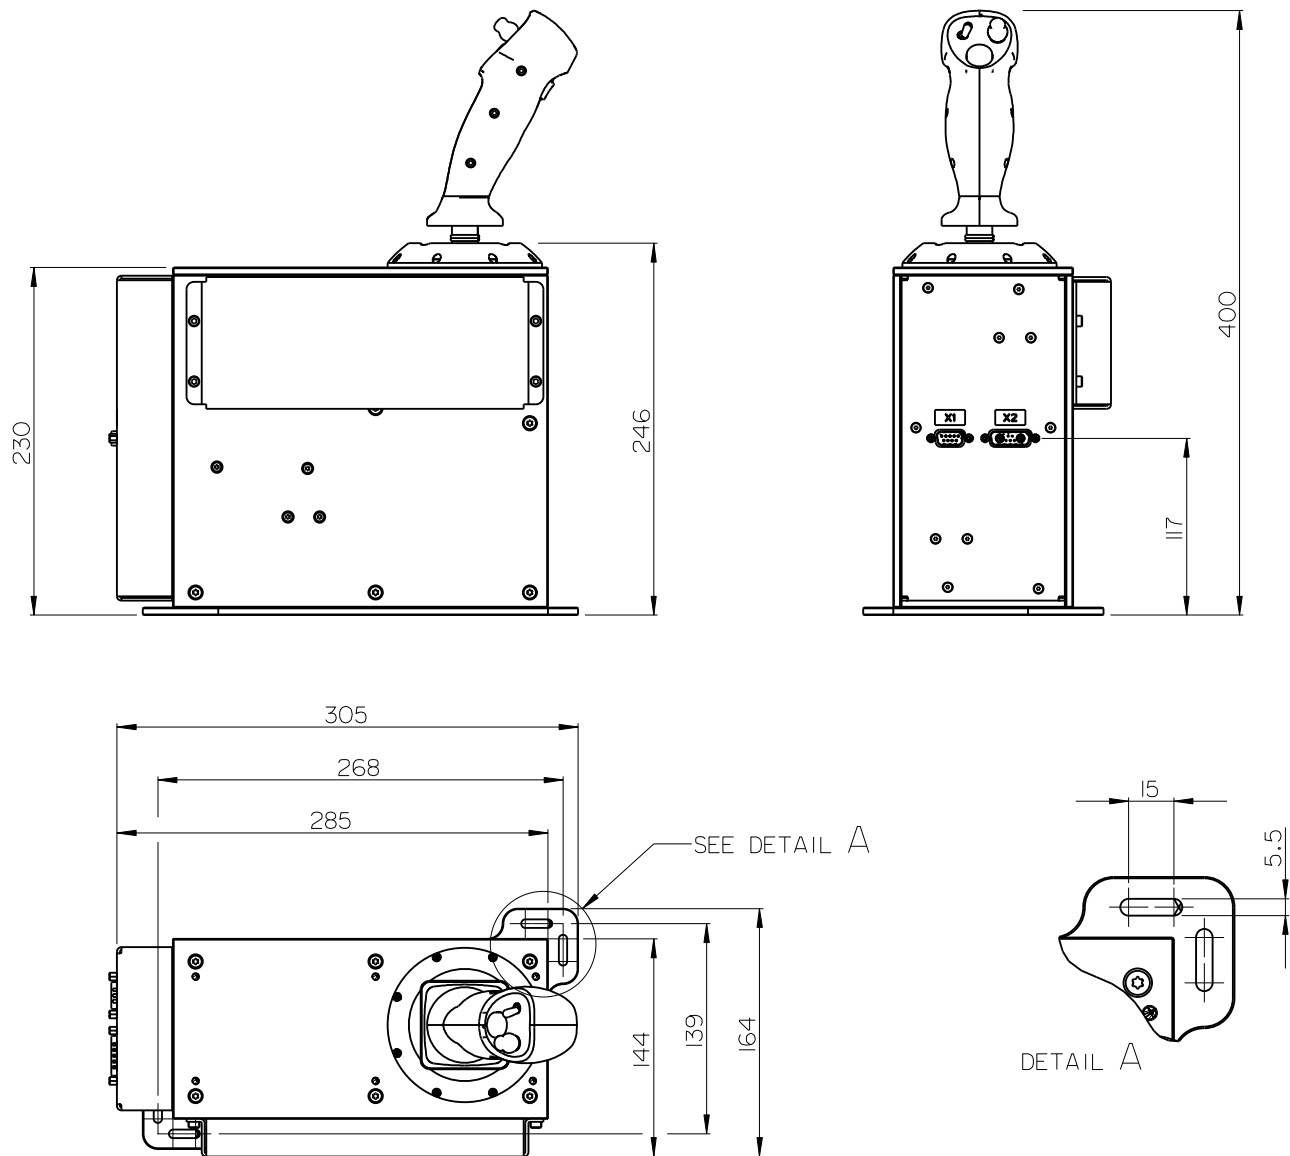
Dimensions of the SENSO-Stick, all dimensions in mm
